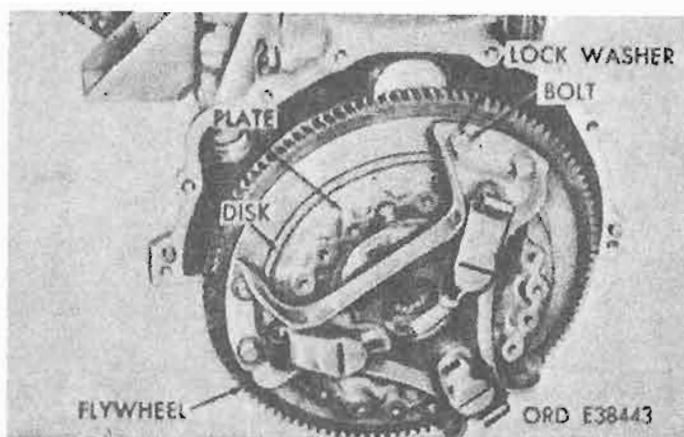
Clutch pressure plate and disk—removal and installation.
